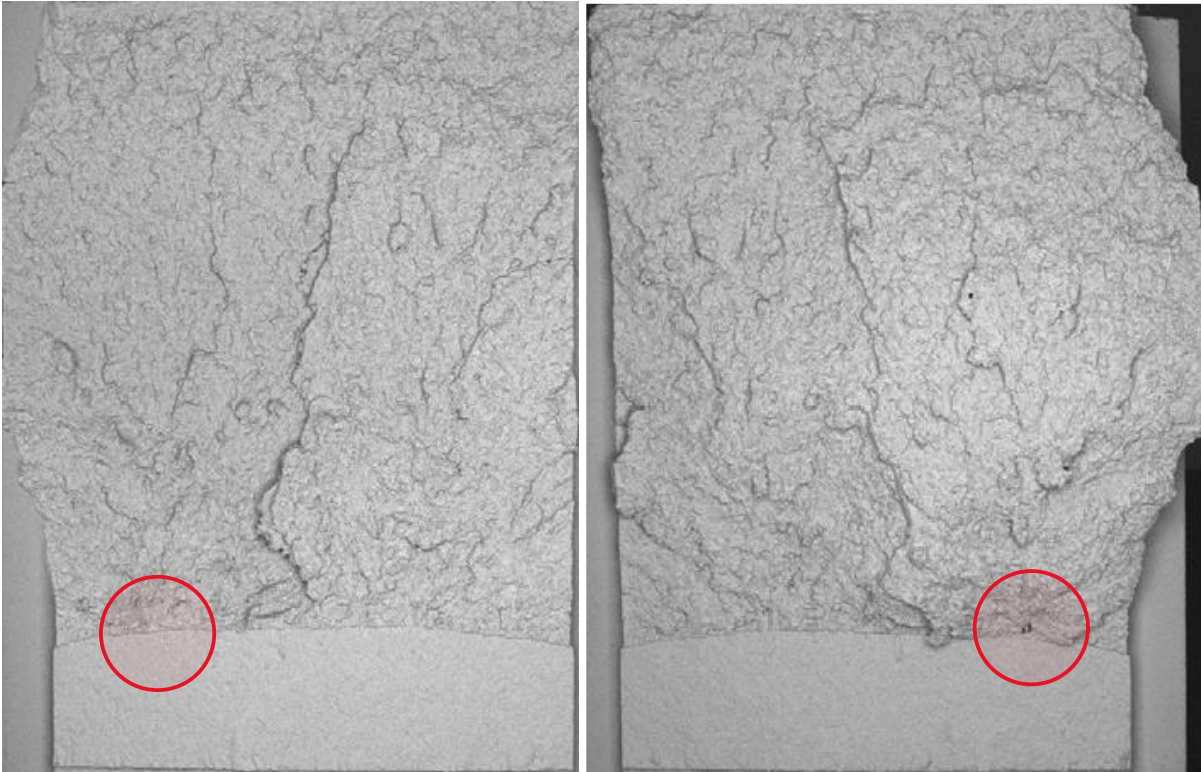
Left and right fracture surface of unirradiated 10 mm C(T) specimen B1C.1.2, showing predominantly cleavage fracture. The primary cleavage fracture initiation region is marked by a red circle. The test temperature was -85°C and the fracture toughness $138.4 \text{ MPa}\sqrt{\text{m}}$ which explains the considerable roughness of the fracture surface. Cleavage initiation occurs in a region without special features. There are isolated Al_2O_3 inclusions located in the fatigue crack growth region, but none are identified in the cleavage fracture region. Manganese sulfides present close to the end of the specimen are unrelated to cleavage fracture. Manganese sulfides at the fatigue crack tip can possibly have interacted with the cleavage fracture if they are close to the initiation site. Their location information is, however, not given.
